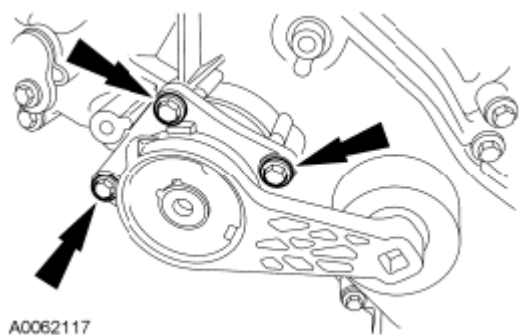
Locating Accessory Drive Belt Tensioner And Bolts
